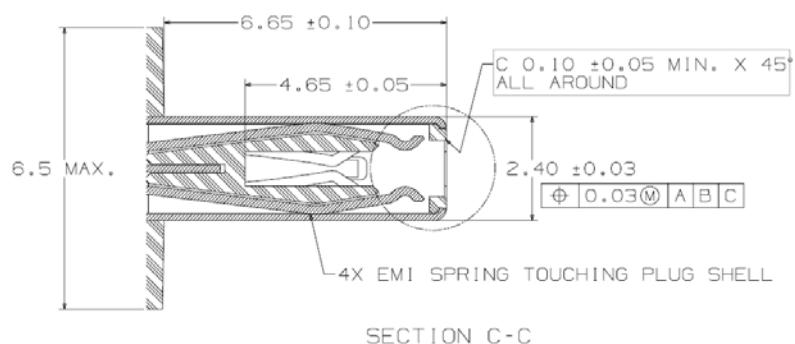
USB 2.0 Type-C Plug Interface Dimensions, cont.
